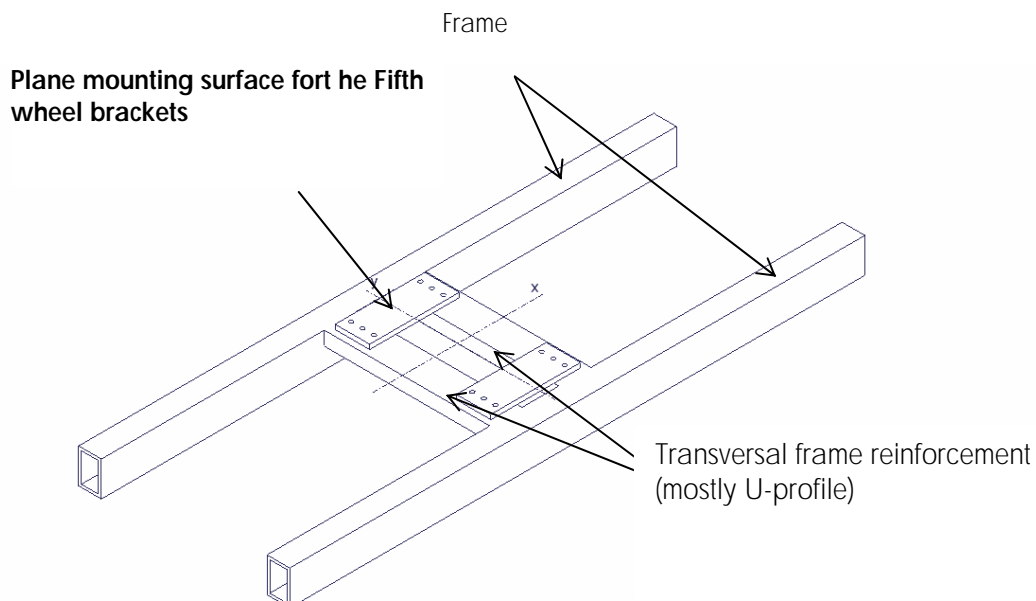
Example for a frame with two plane parallel mounting surfaces for the SK-L 26.3
